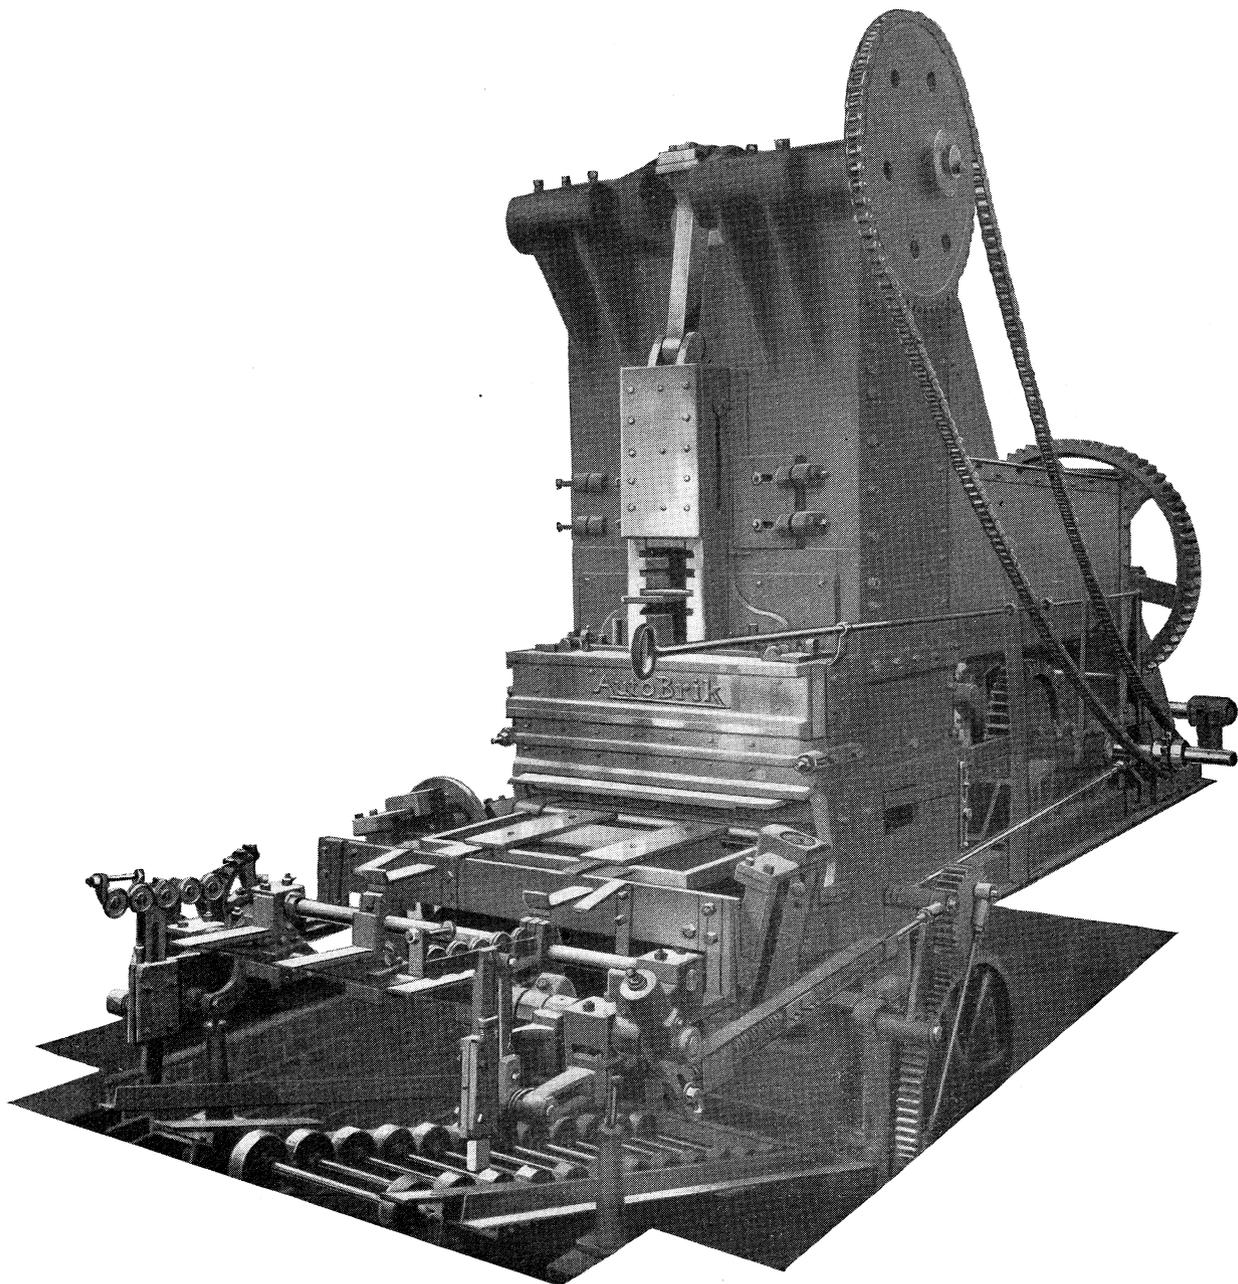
Plate XIII.—Automatic soft mud molding machine with outside press box.
